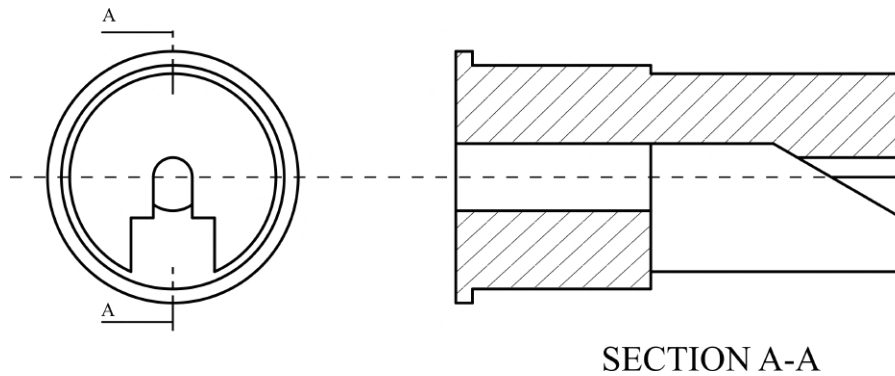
A schematic drawing showing the front and side view of the sabot deflector.
